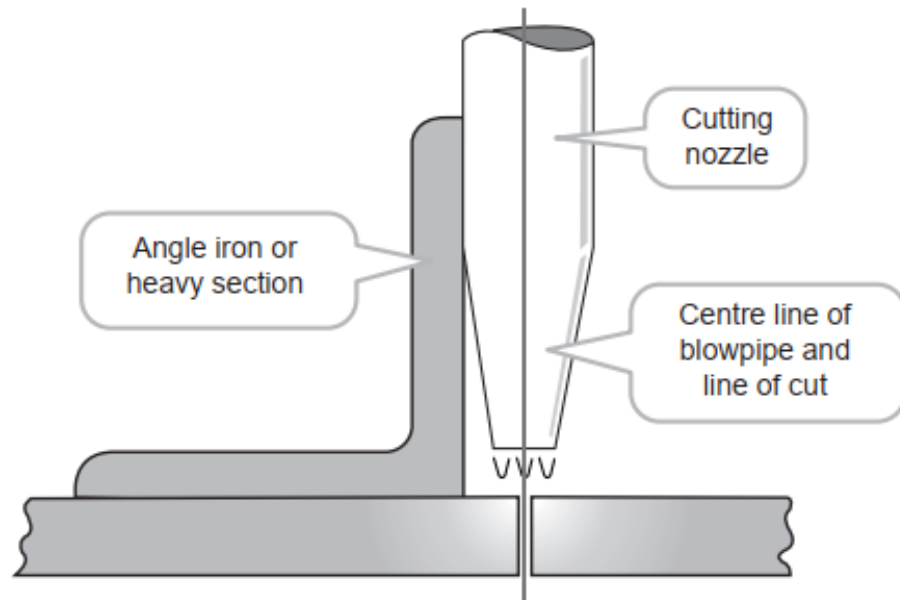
Straight line cutting – using Angle irons or heavy steel sections
